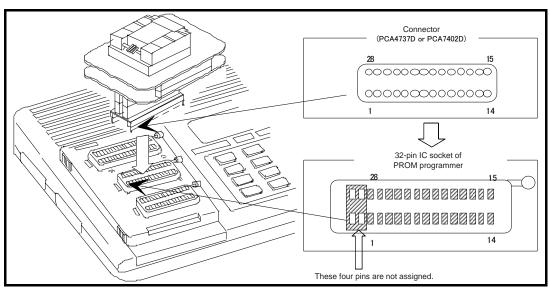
Attaching the adapter to a PROM programmer (PCA4738D or PCA7402D)
